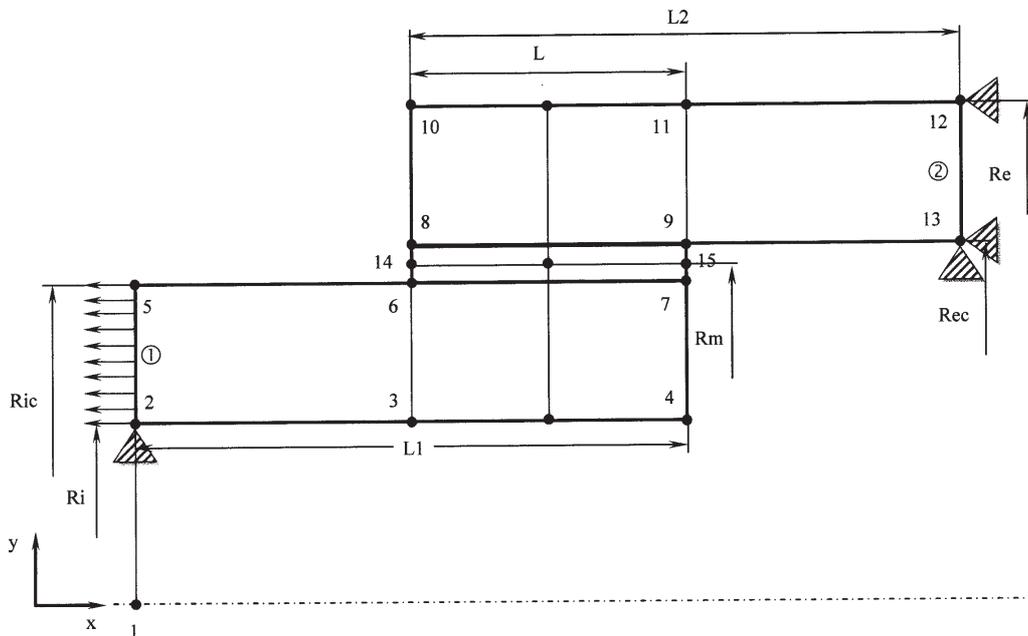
CAD diagram of a cylindrical adhesive bonded joint
